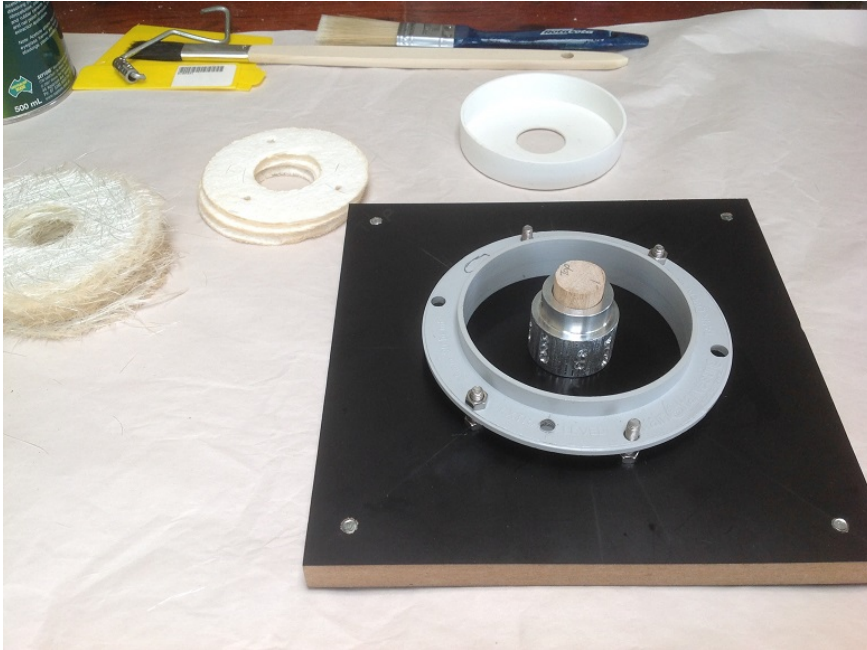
Rotor supporting structure ready for polyester resin. The symmetrical cut-outs are visible on the surface of the Rotor Bushing. The concentricity of the Rotor Bushing and the *former* is maintained.
